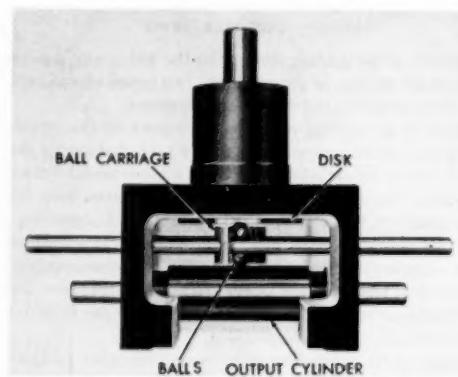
CUTAWAY VIEW OF BALL-AND-DISK INTEGRATOR
